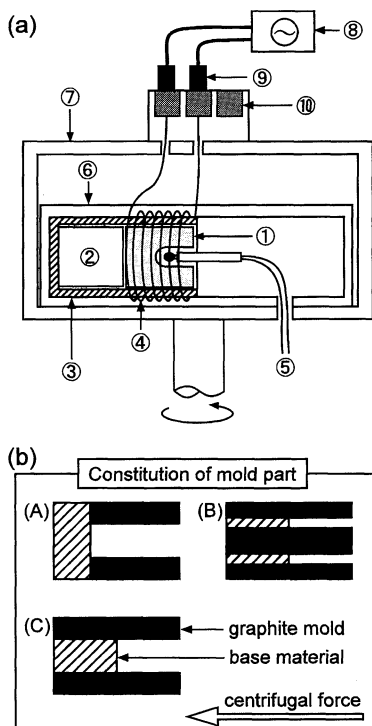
Schematic illustration of experimental apparatus. ① green compact, ② mold part, ③ alumina container, ④ heating coil, ⑤ thermocouple, ⑥ inner steel container, ⑦ outer steel container, ⑧ electric source, ⑨ graphite brush, ⑩ slip ring.
